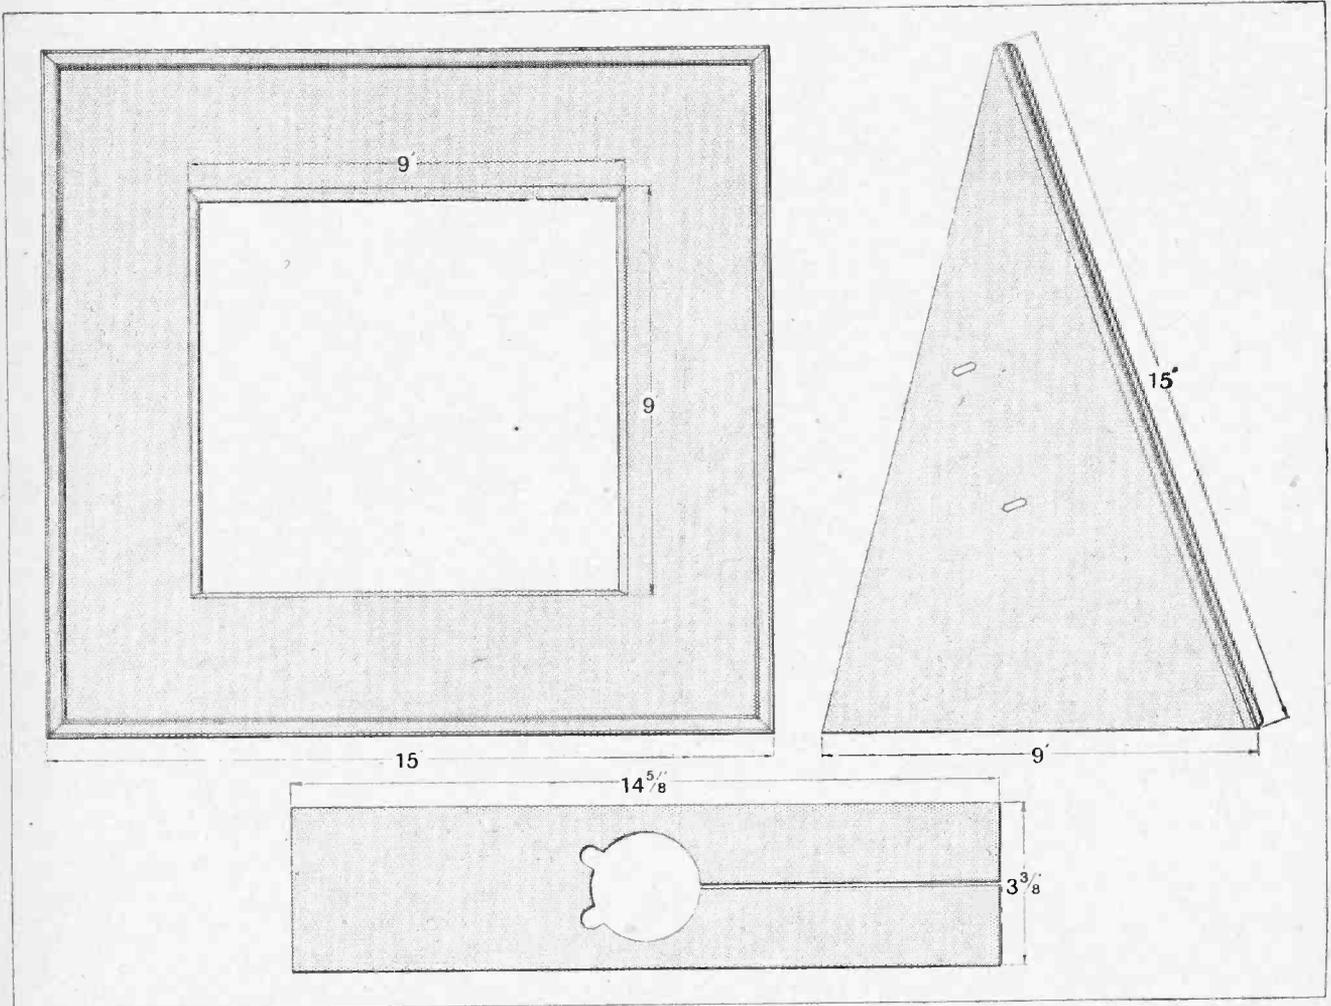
Dimensions of the 3-ply-wood case, and of the clamp for the unit, made of half-inch wood.
